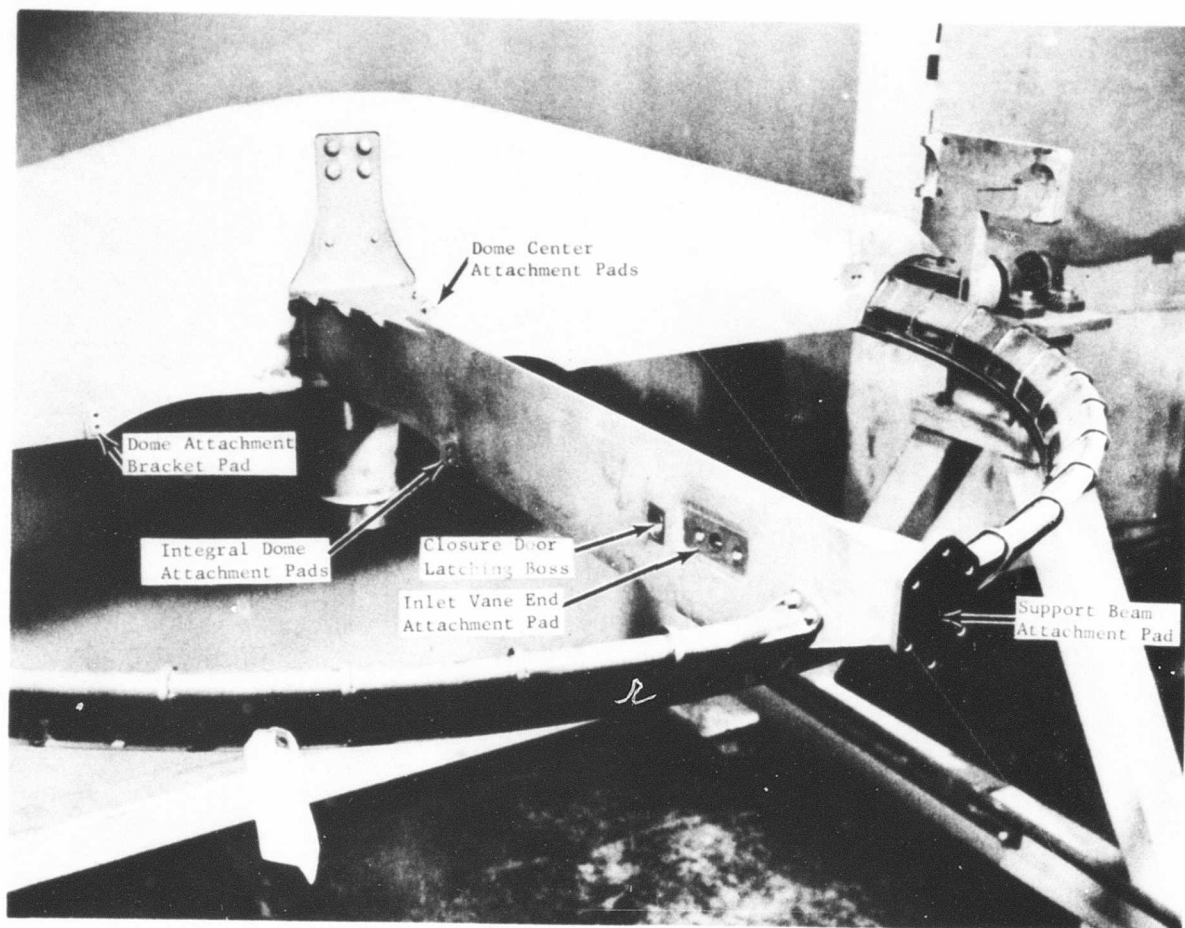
LF-2 Front Frame View Showing the Cast 17-4 PH Hub With its Integral Fabricated 17-4 PH Strut; Also Shown is the Attachment of the 3 to 6 O'clock Hot-Side Sector to the 3 O'clock Strut and the 3 O'clock Strut Support Beam Attachment.
